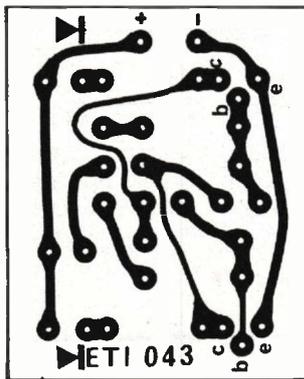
Printed-circuit Board layout. Full size 50 x 40mm.
